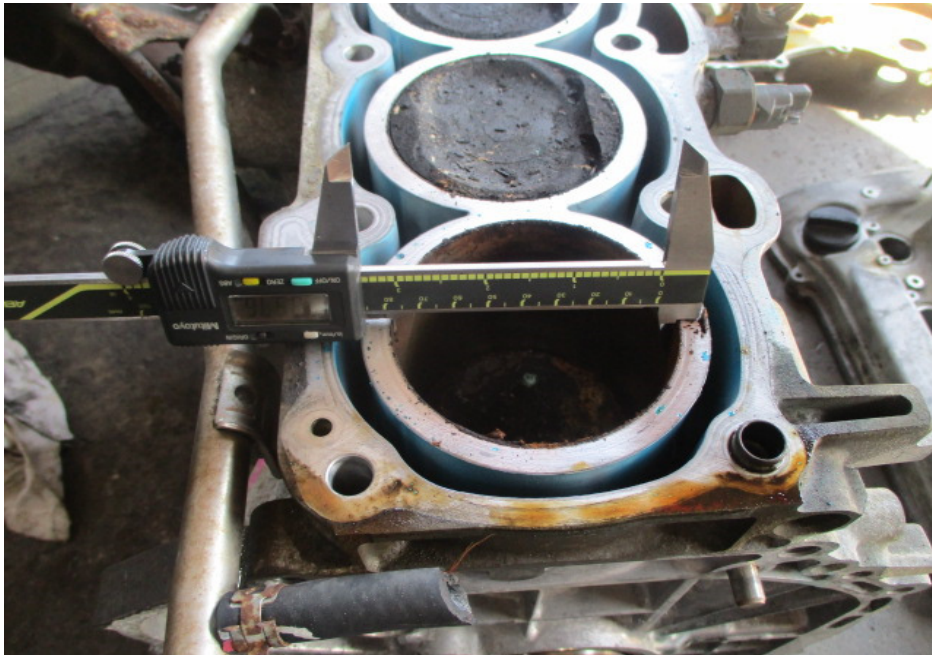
shows measurement being carried out to the stroke (arrowed) of cylinder 3 of the Toyota engine. The bore and stroke measurements of the Toyota engine were carried out using a digital Vernier Caliper that was calibrated before the start of measurements.
